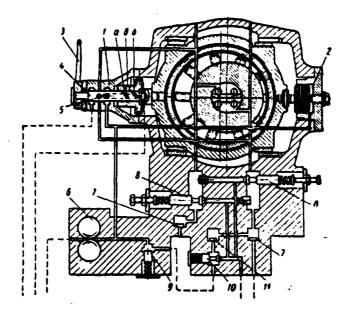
Diagram of lever control or rotary - plunger pump with revolving valve; 1 and 2 - block displacement cylinders; 3 - control lever; 4 - control valve; 5 - opening which connects operating line of pump; 6 - gear - type pump; 7 - head valve; 8 and 10 - safety valves; 9 - head valve 11 - check valve.
